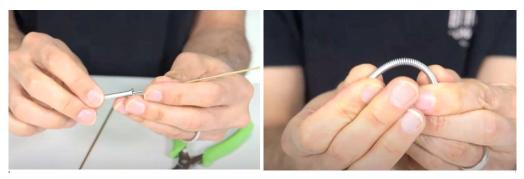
Inserting a brass tube into a spring-type tube bender and bending the combination. (Hearns Hobbies)
